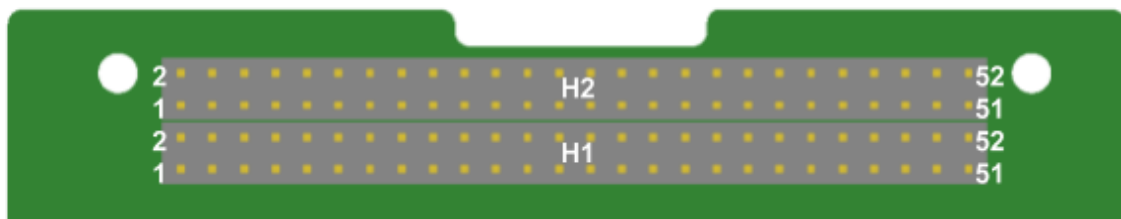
CAD Drawing Showing the Top View of Connectors H1 and H2
